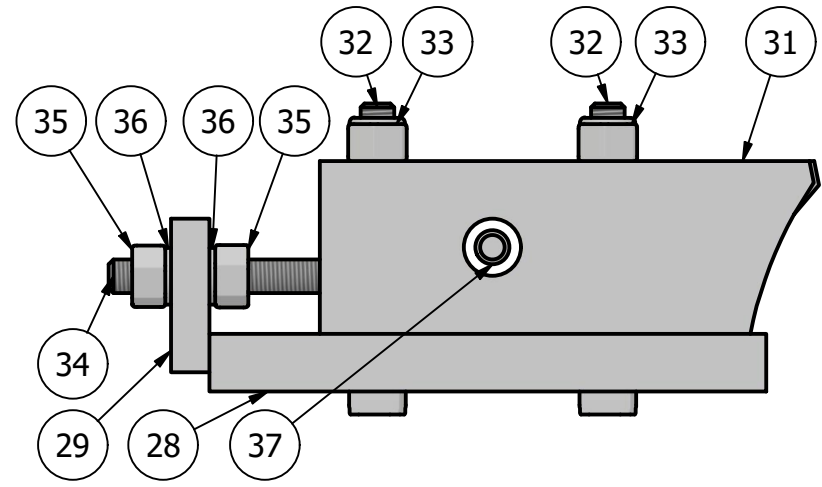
# DETAIL VIEW - ANVIL RACK ASSEMBLY
